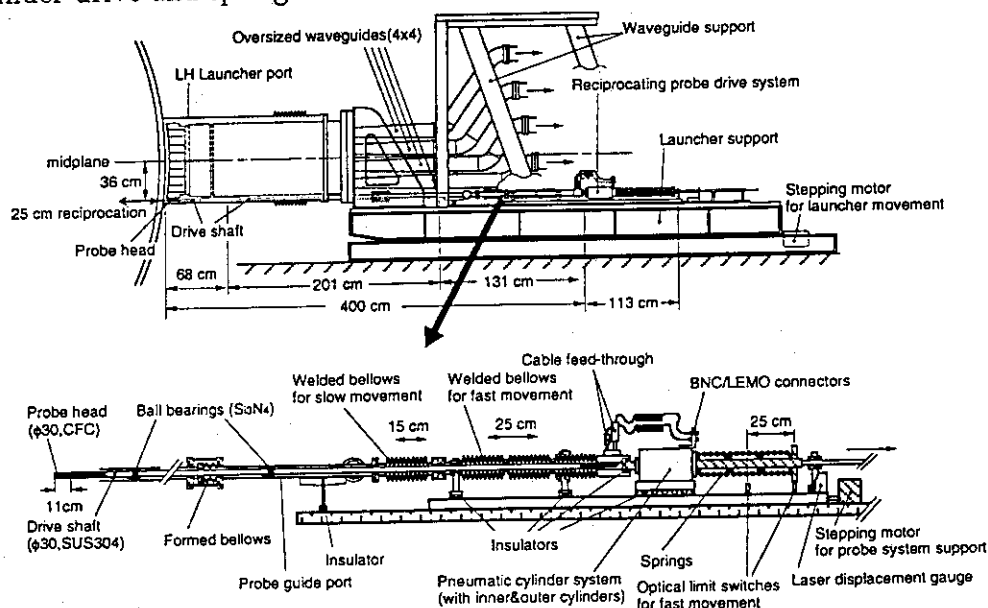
Fast reciprocating probe system (RPS) is incorporated into LH launcher.
